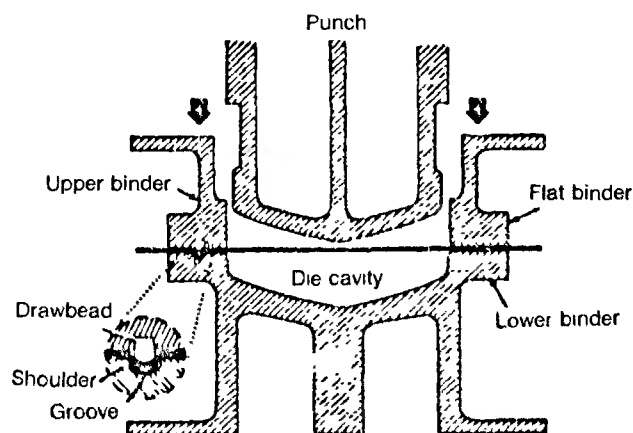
Schematic sketch of a typical stamping set-up. Insert shows a draw bead.
